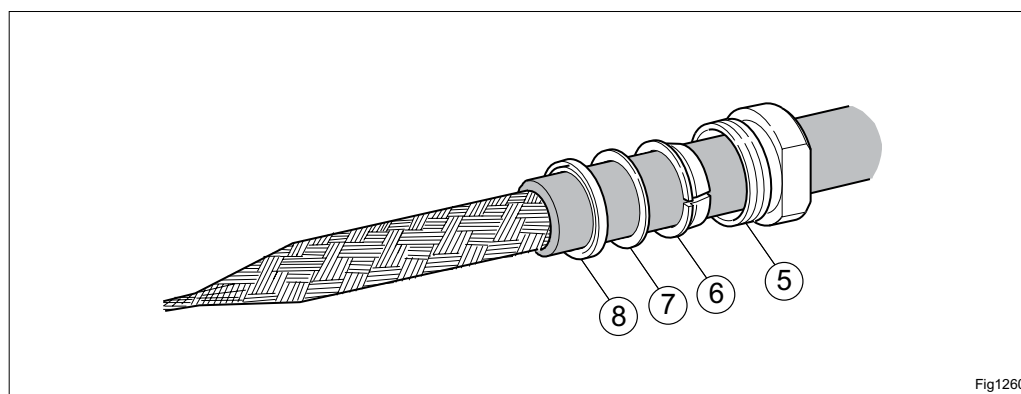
Pulling the shield and sliding on the screw nut, the conical case, the washer and the gasket.
